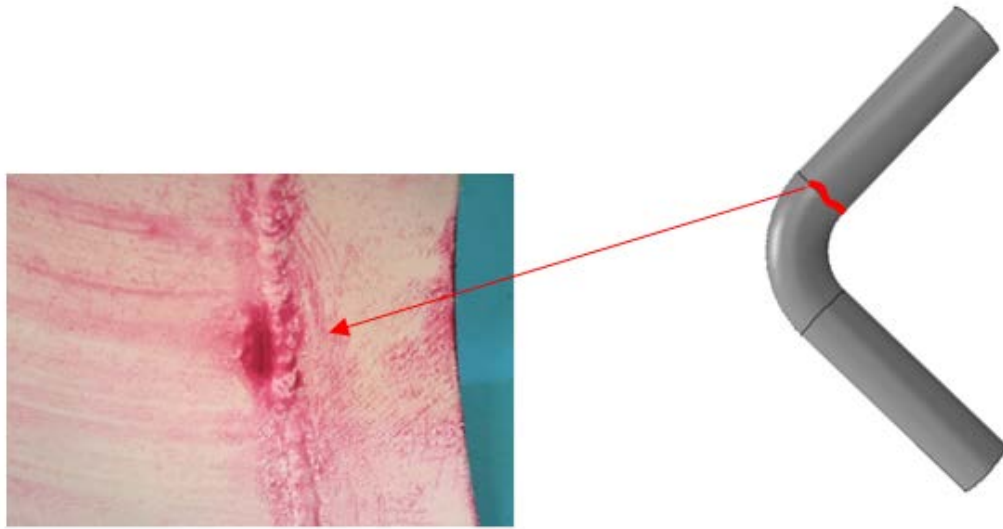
Fatigue crack at the vicinity of girth weld between the elbow and the pipe, in reinforced pipe elbow-specimen No. 6.
